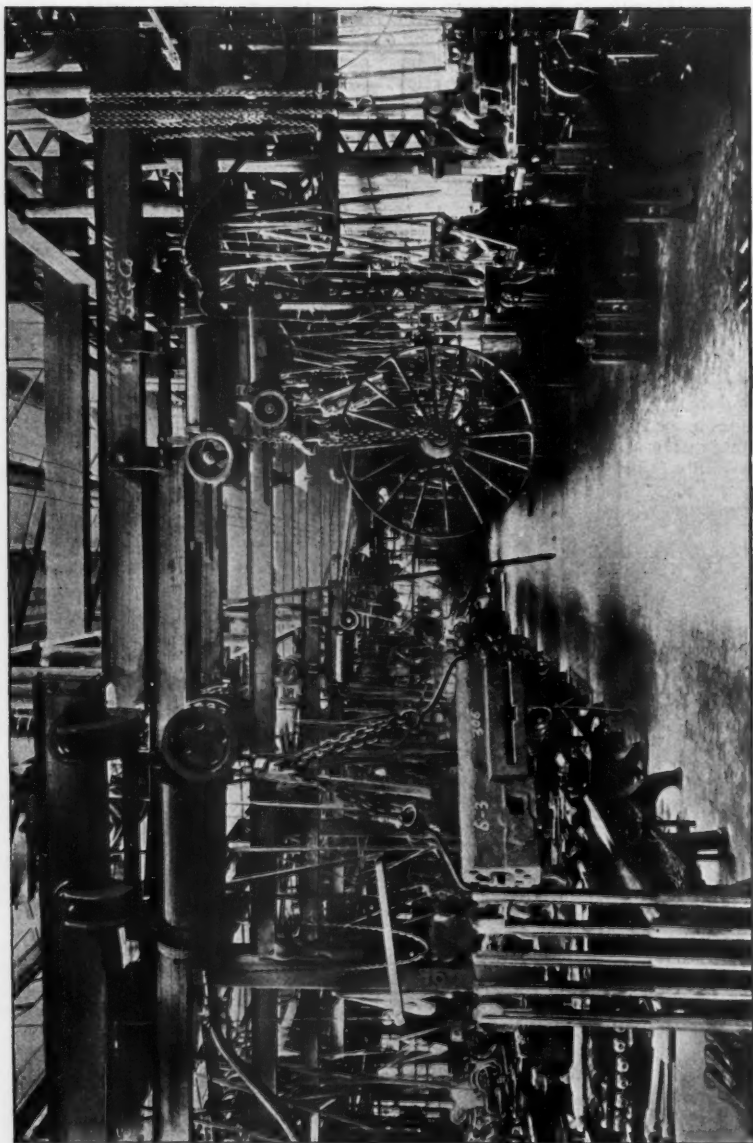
OVERHEAD HORIZONTAL PNEUMATIC HOISTS FOR HANDLING MACHINE WORK IN THE SHOPS OF THE
